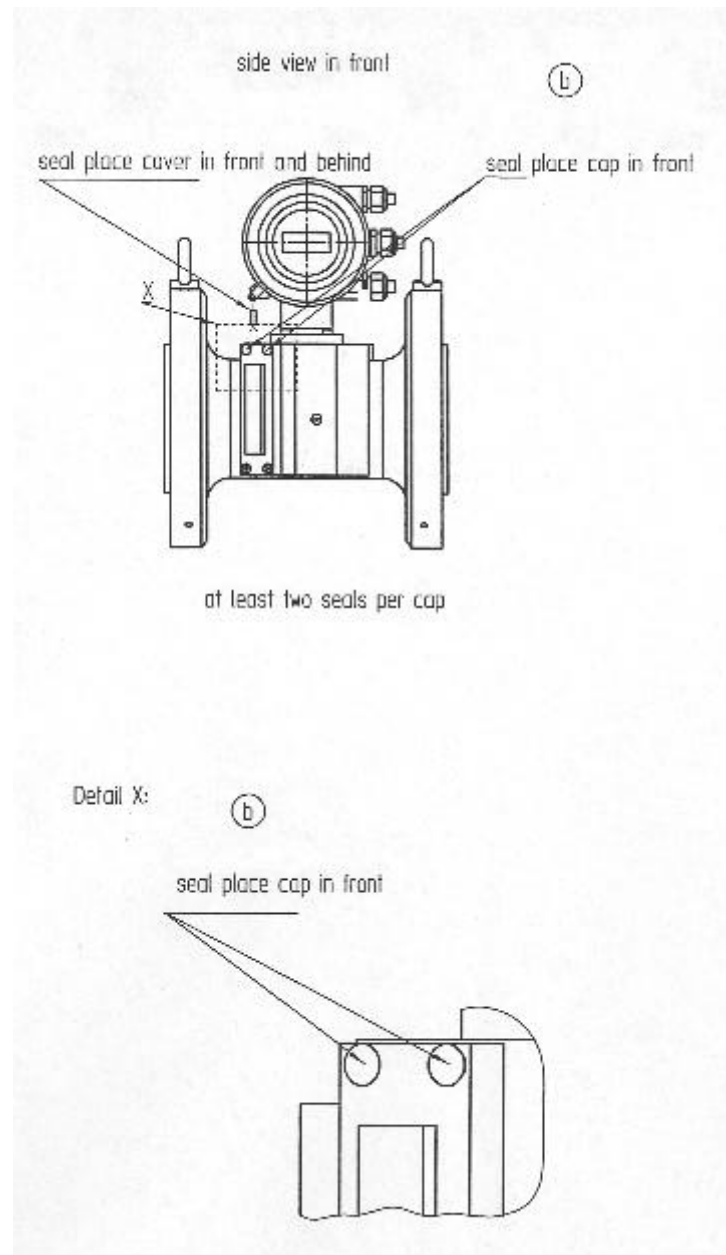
Sealing of Transducers, view 1 of 2 / Scellage des transducteurs, vue 1 de 2
